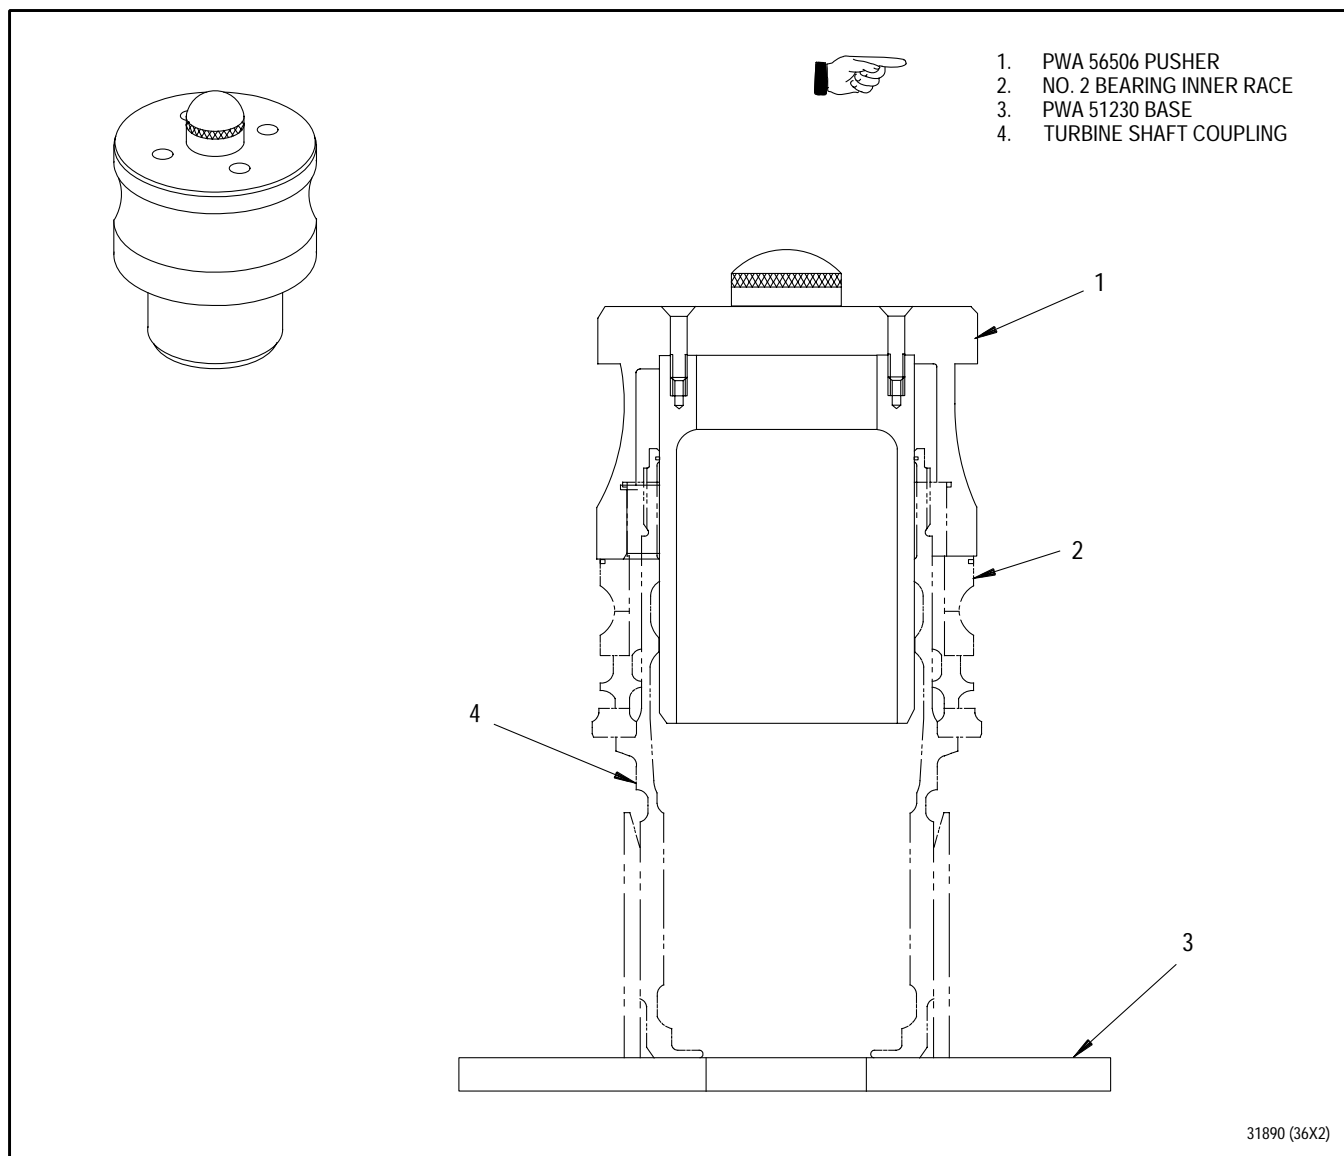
No. 2 Bearing Inner Race - Assembly Tooling
